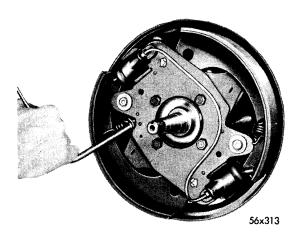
Removing Front Brake Shoe Return Spring with Tool C-3462
